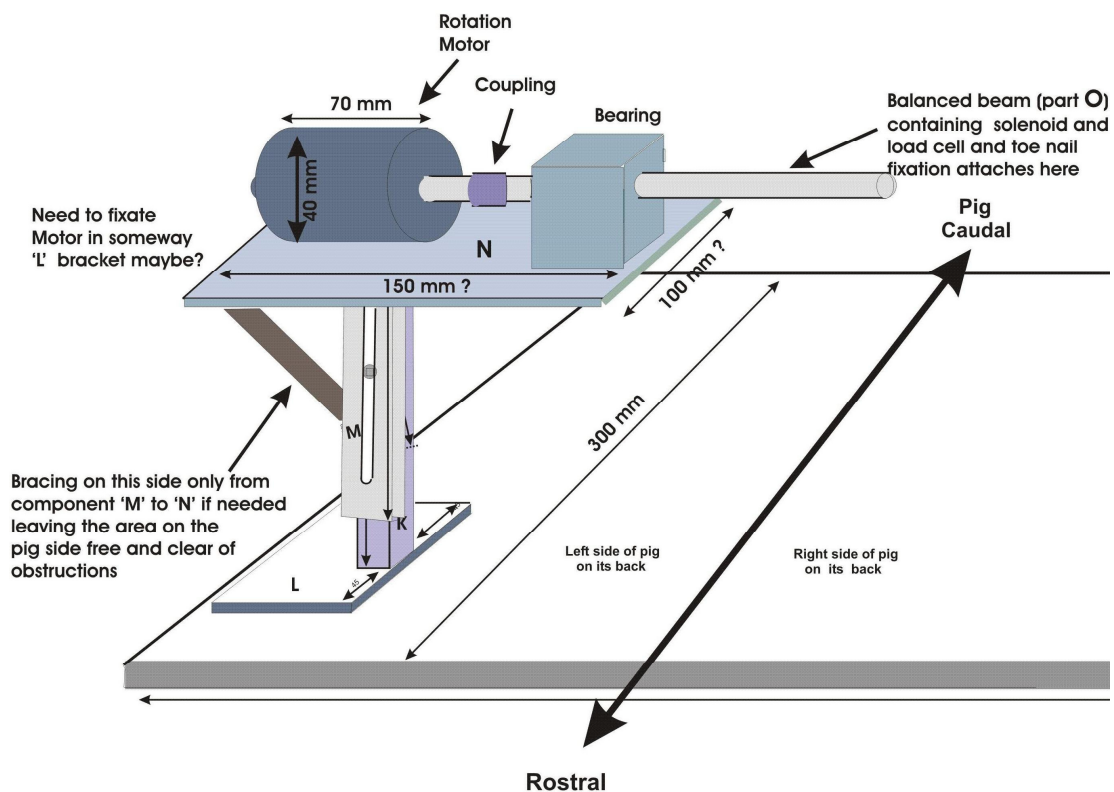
Overview of initial test-rig platform with parts K, L, M and N.
